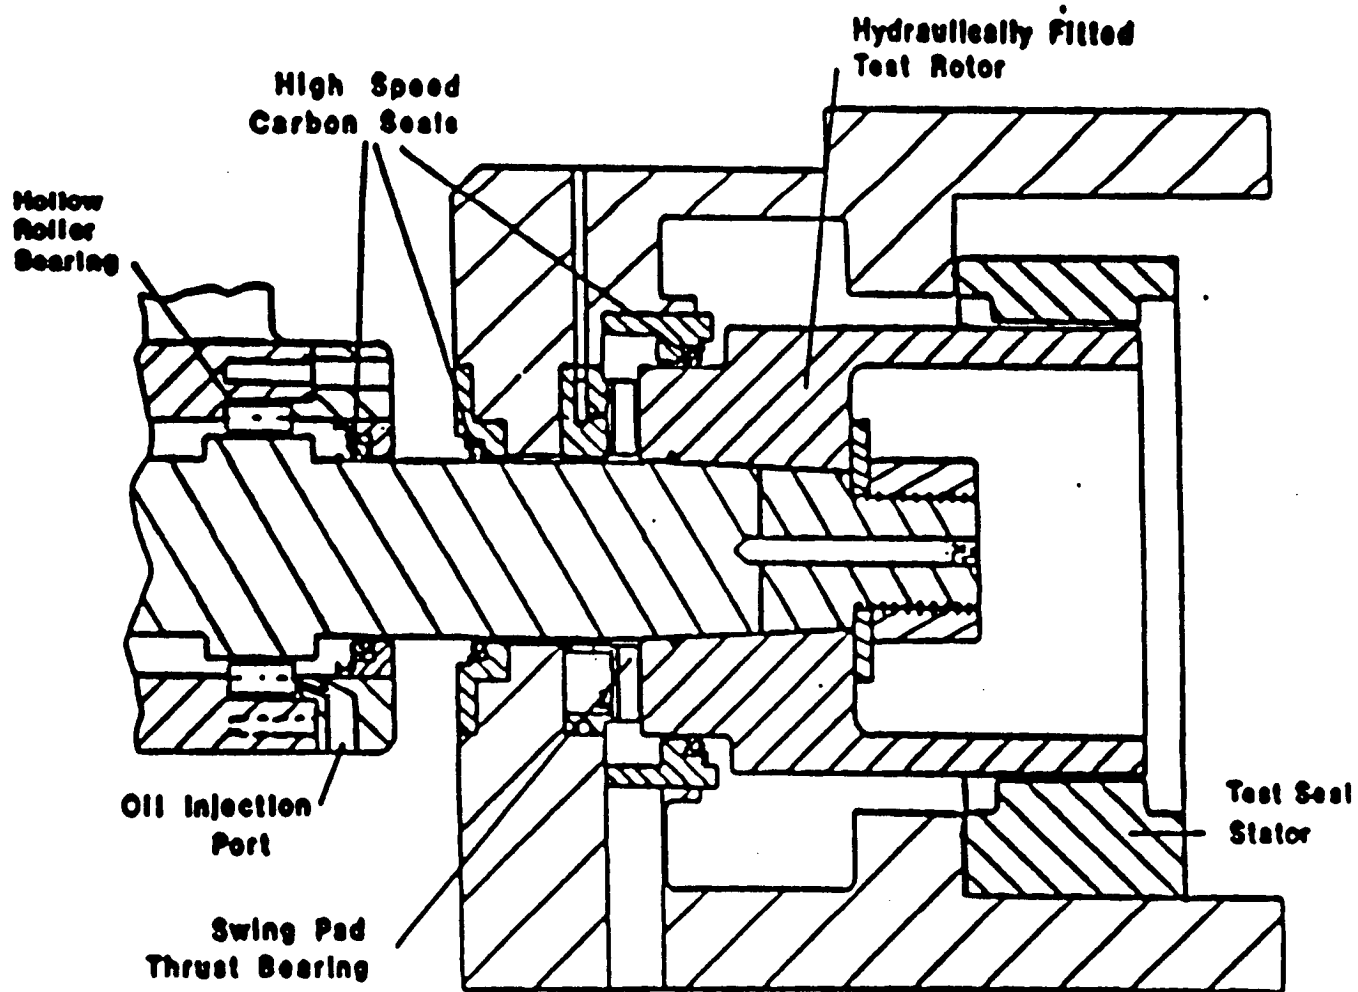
Cross-sectional view of test section showing rotor-shaft assembly.
